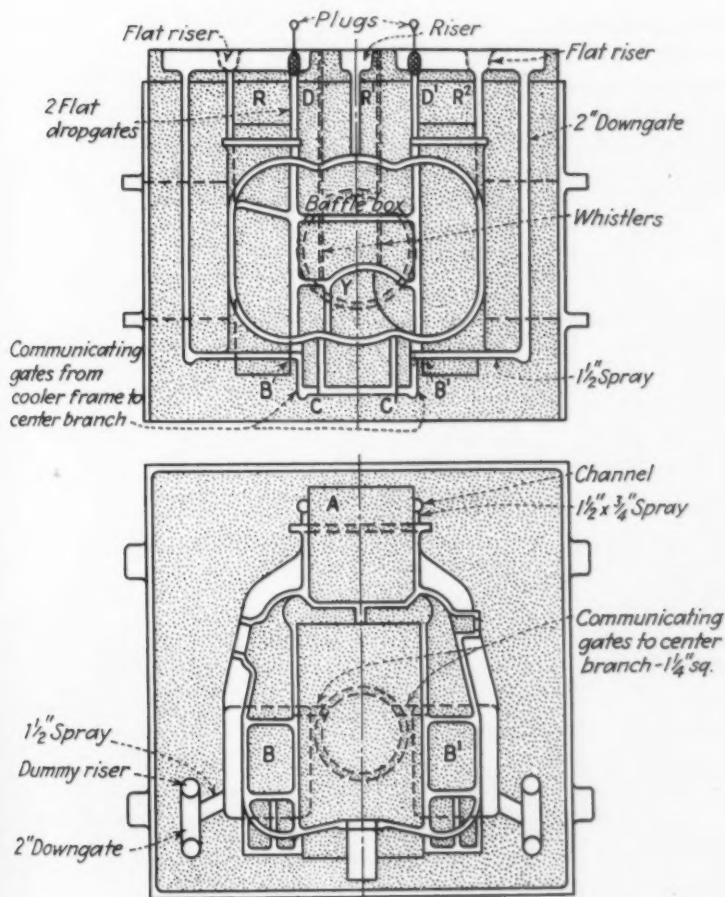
Because of the size and section of this de-aerator casting, the gating and feeding methods used were particularly important in securing a sound casting.
